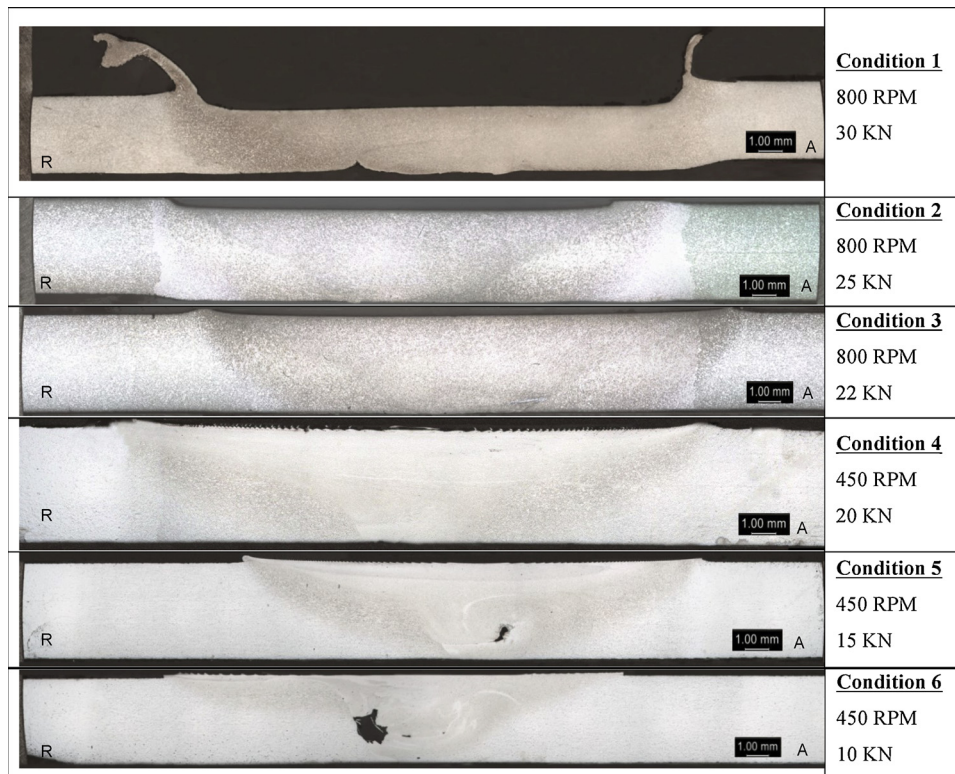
Cross-sectional macrographs of different welded conditions of AISI 410S steel.
